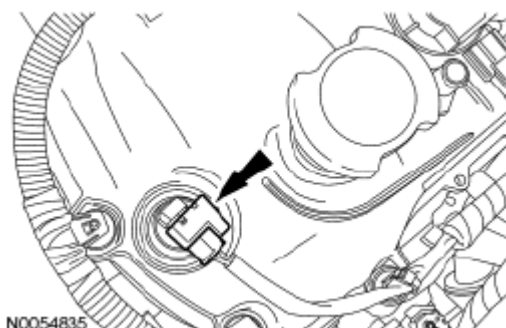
Locating LH VCT Solenoid Electrical Connector
